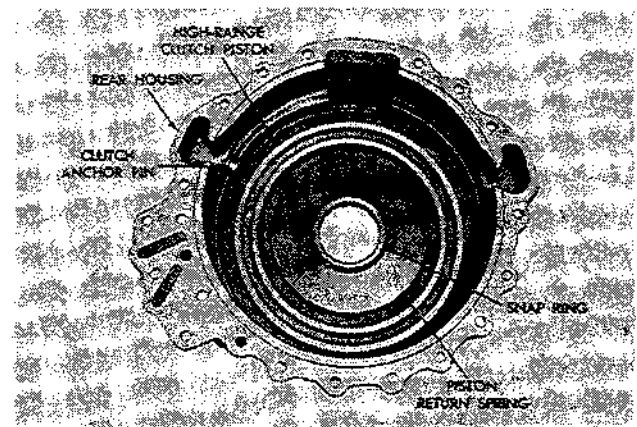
REAR HOUSING AND PISTON ASSEMBLY
